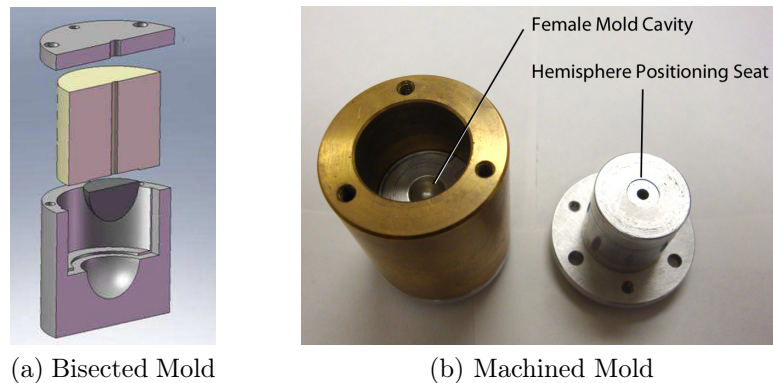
Multi-layer Coating Mold. (a) The mold for one layer of coating is shown in an expanded bisection sketch. The hemisphere is also shown in this sketch. (b) The two part finished mold. The hemisphere mounting piece slip fits into the brass sleeve which holds the molding cavity. This slip fit aligns the hemisphere to the molding cavity. Also pictured, a small hole traverses the length of the hemisphere mounting sleeve. A dowel pin can be inserted into the hole to remove the hemisphere if needed.
